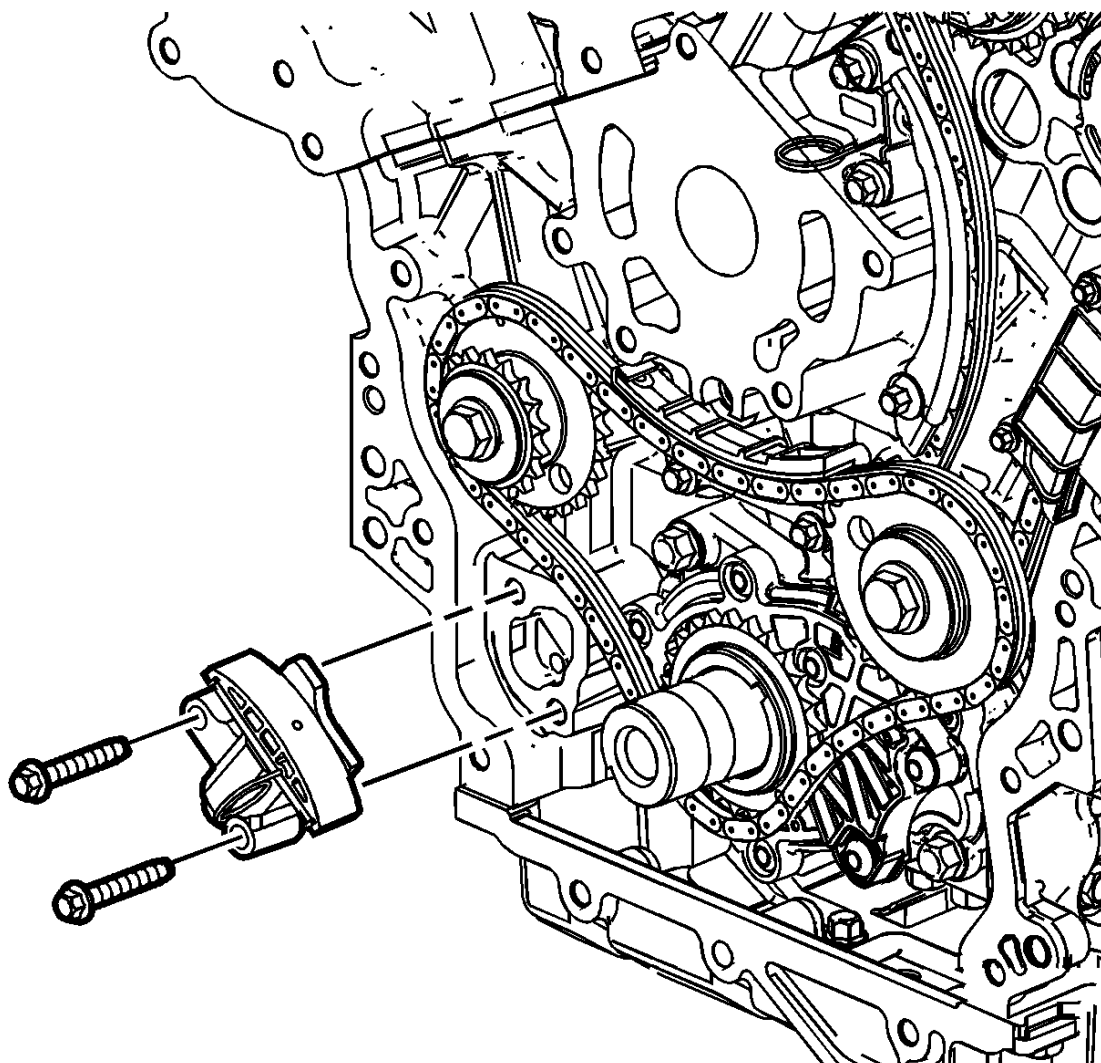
View Of Primary Camshaft Drive Chain Tensioner
